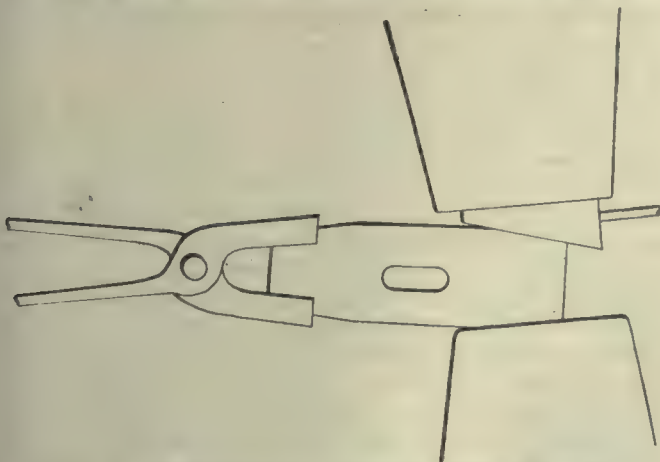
METHOD OF DRAWING SLEDGE TAPERS
